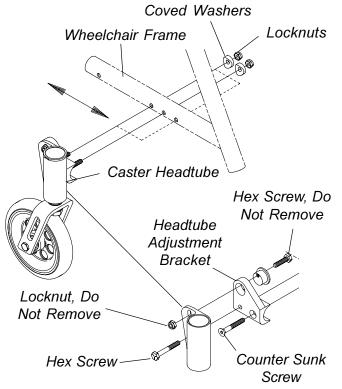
REPOSITIONING CASTER HEADTUBES ON WHEELCHAIR FRAME
